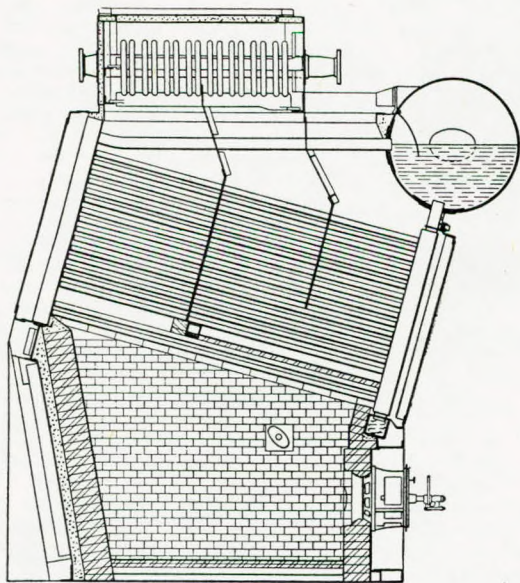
Longitudinal section of 2-in. tube header-type marine boiler with superheater.
